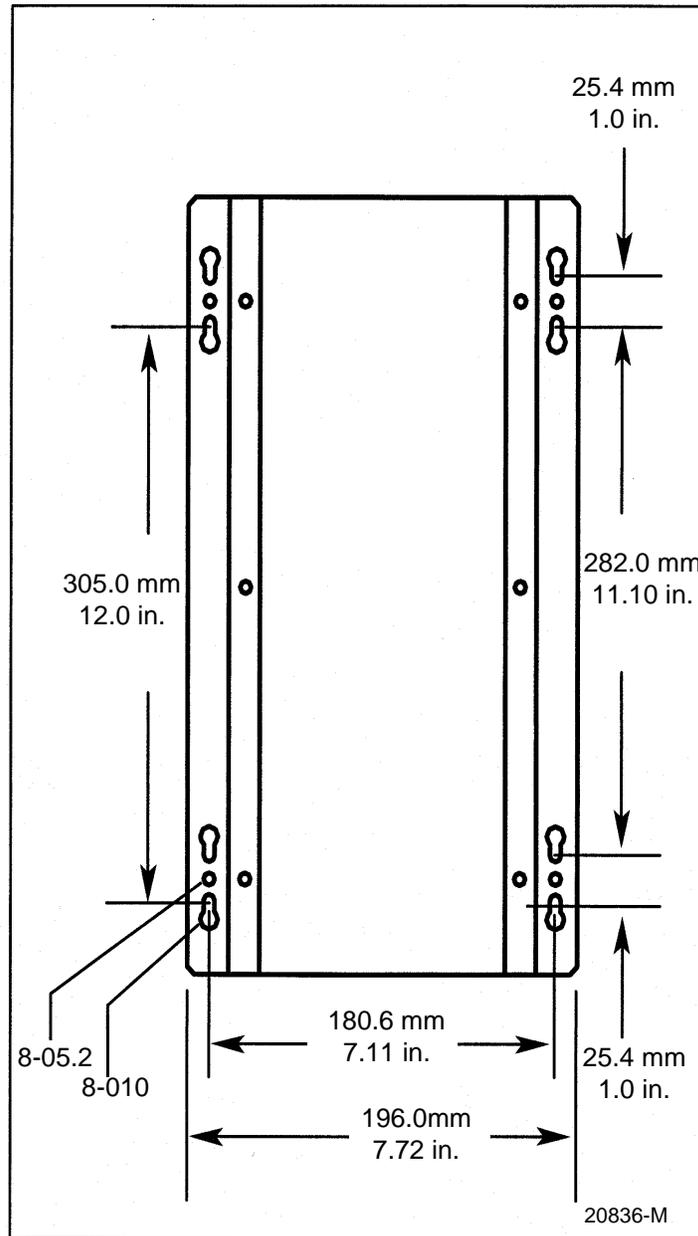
AutoMax PC3000 Packaged Version Mounting Dimensions
